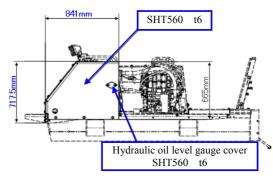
Protection covers for hydraulic oil tank (Right side view)
